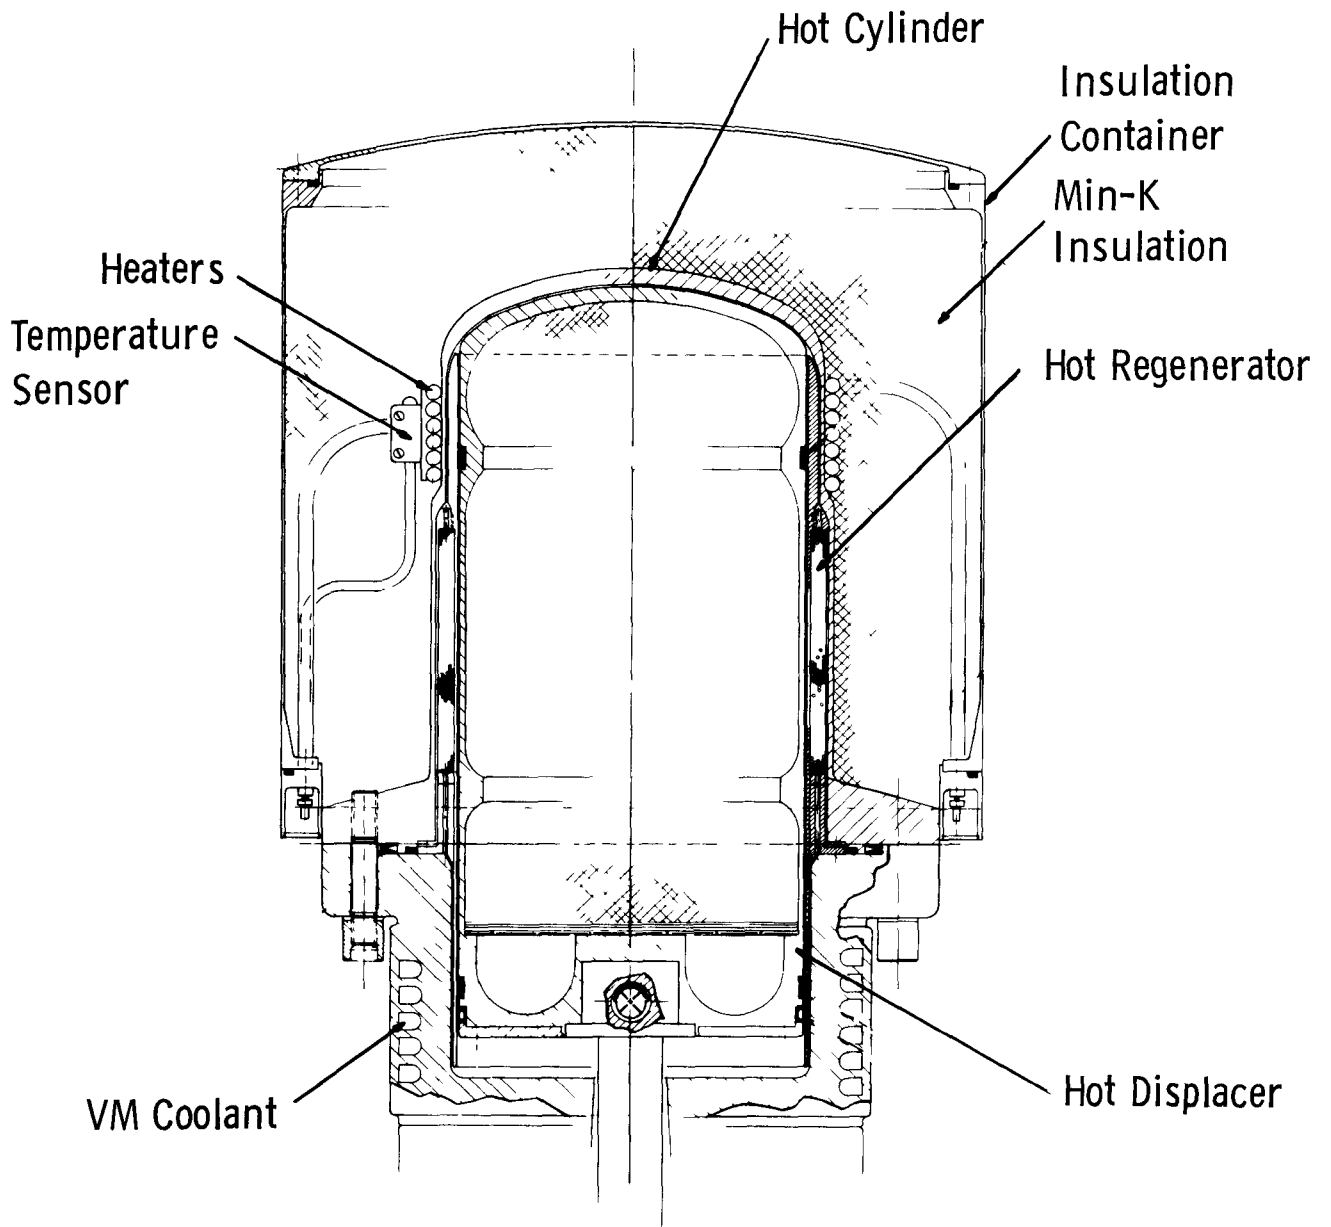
VM REFRIGERATOR HOT-END ASSEMBLY
